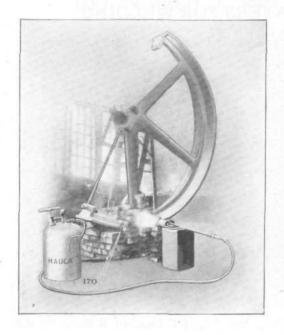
No. 7 and 8 Double Burner Outfit in operation on preheating a large flywheel for welding.
